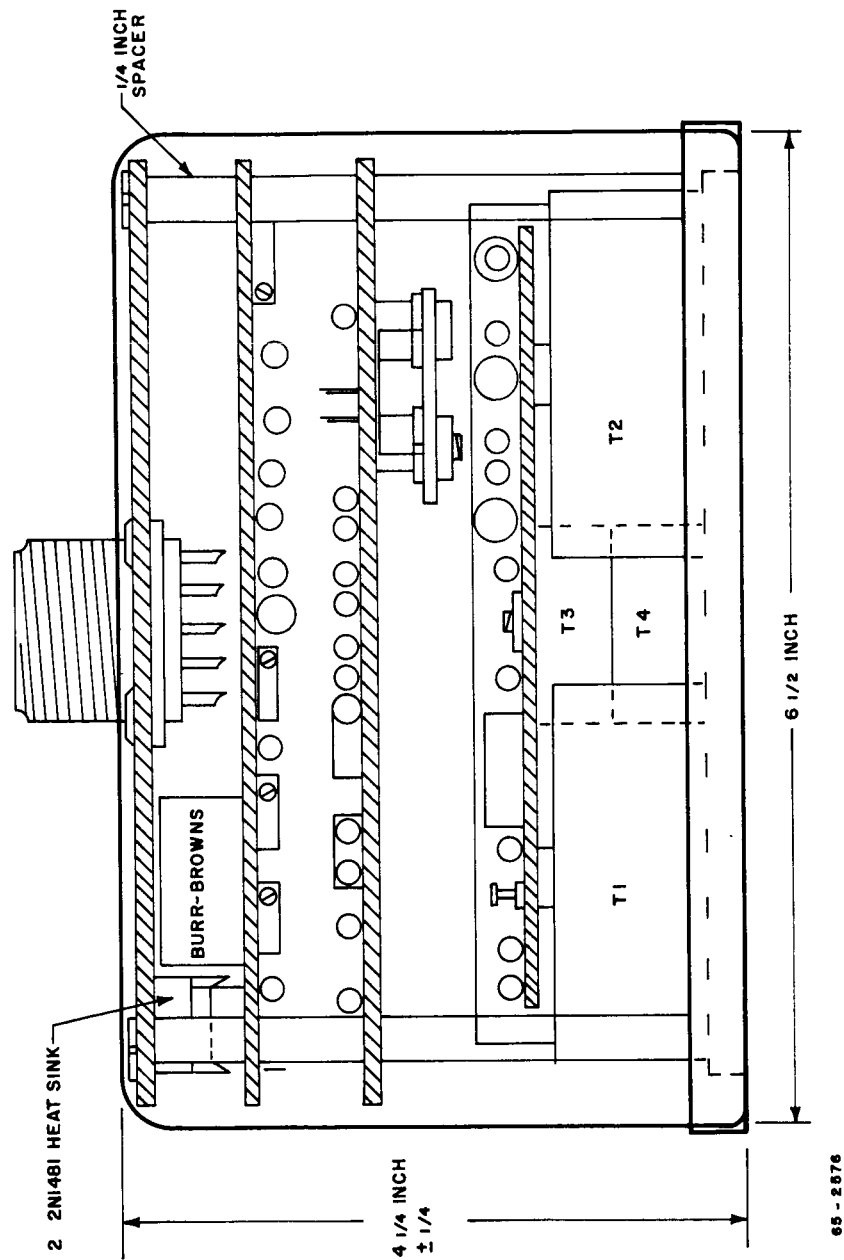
SECTIONED VIEW OF THE CONTROL LOGIC TEST PACKAGE
